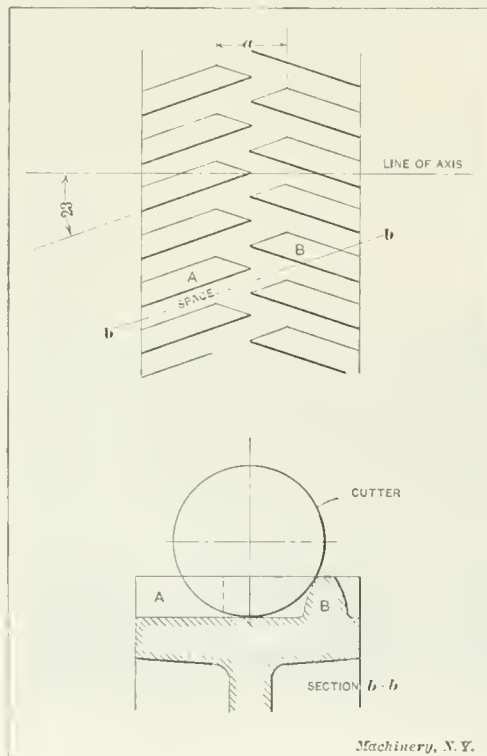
Wuest Herringbone Gear of 23 Degrees
